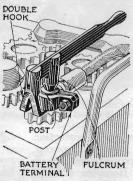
Lever and hook device above is useful in removing corroded battery cable terminals
